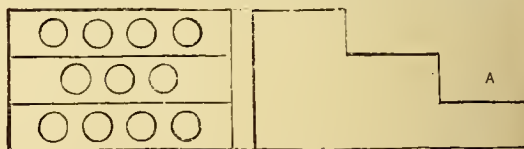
BOTTLE STAND. A, Side Elevation; B, Plan.
